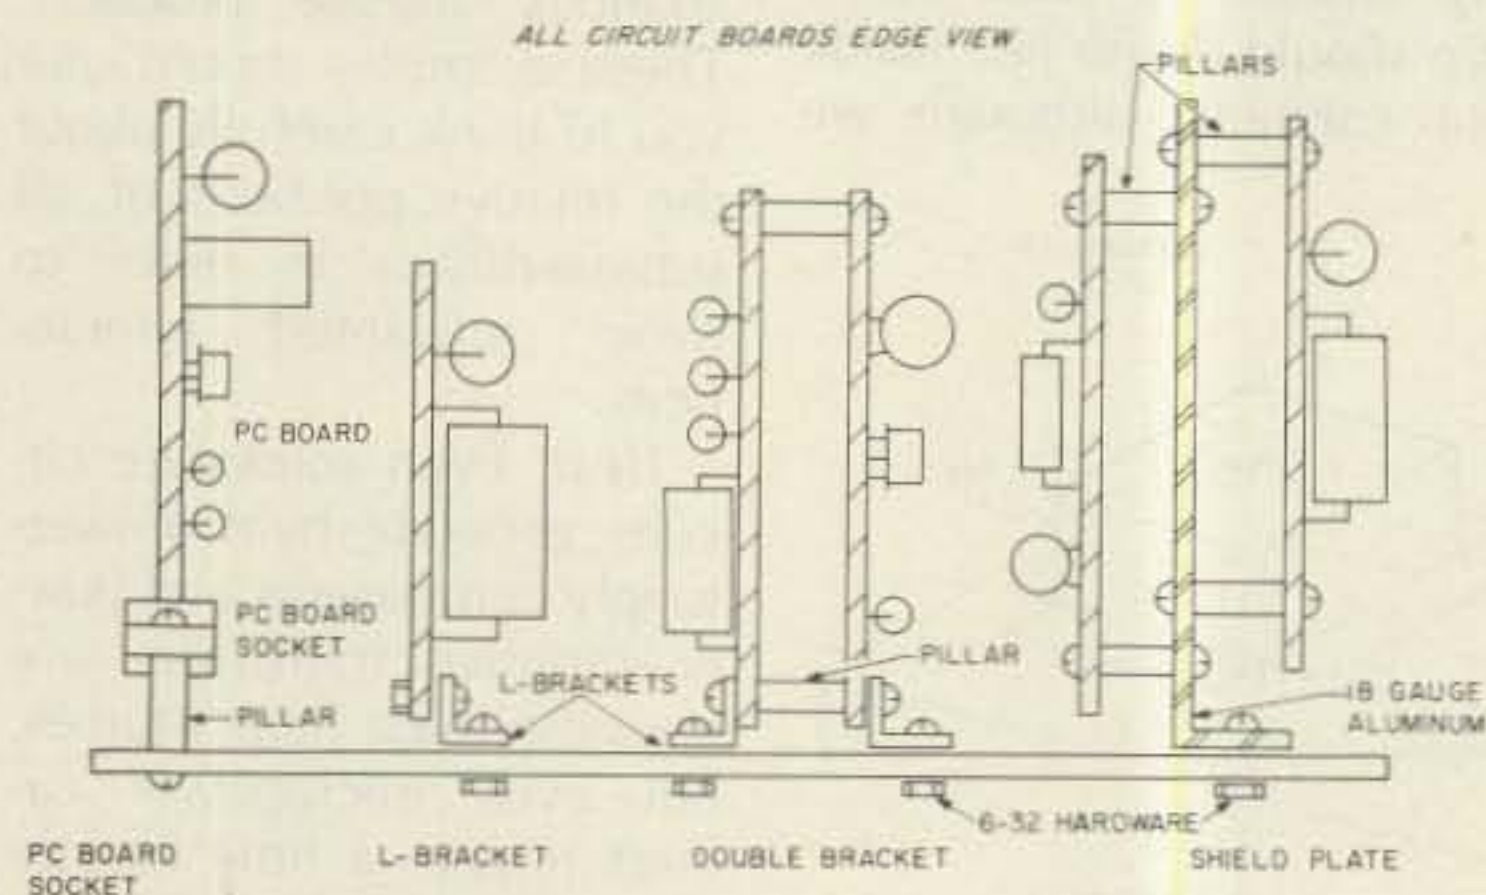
Four methods of mounting circuit boards: PC-board sockets, L-brackets, double brackets, and shield plate.
